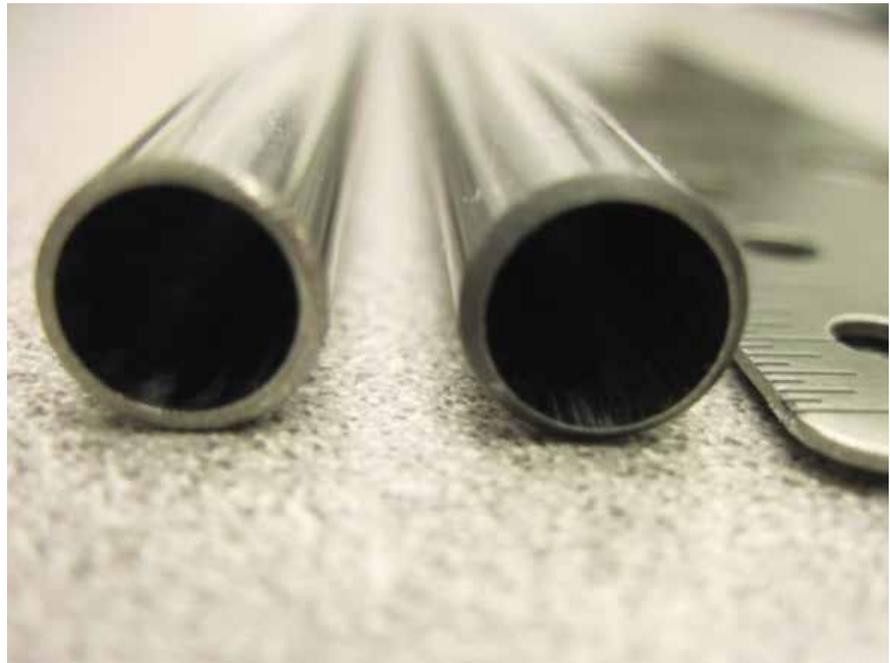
Extruded and Gun-Drilled MA956 Tubing Ready for Pilgering
